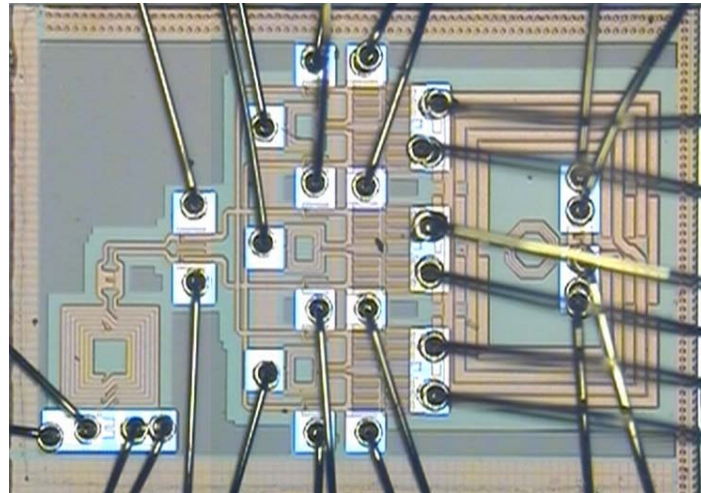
shows the assembled measurement board. The bare chip dies are directly attached to the ground plane of the printed circuit board (PCB) of FR-4 using an electrically conductive silver epoxy. All signal and bias feeding pads are wire bonded to the PCB with gold bond wires. The board loss and the voltage drop of the bias cables are compensated for in the calculation of output power and efficiency while the loss caused by the bond wires is included in the experimental results. No external components are used for the operation.
